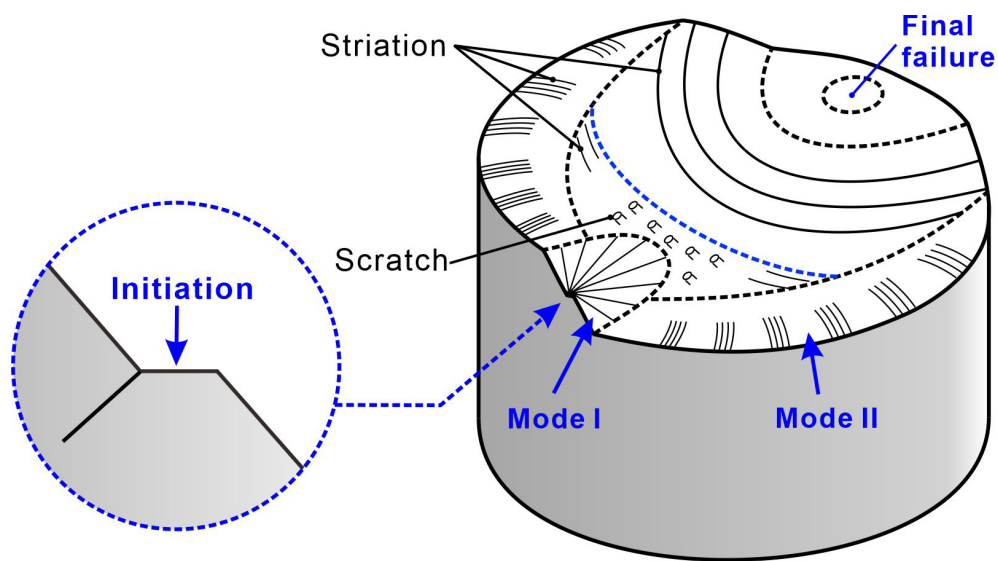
The schematic illustration of the fracture of the torsional fatigue specimen. The striations near the specimen surface are consecutive.
